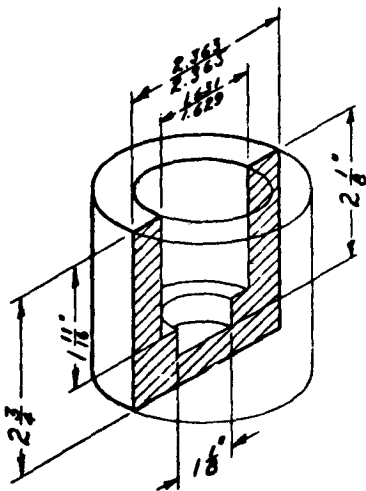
SHACKLE PIN DRIVER (T179-218)
